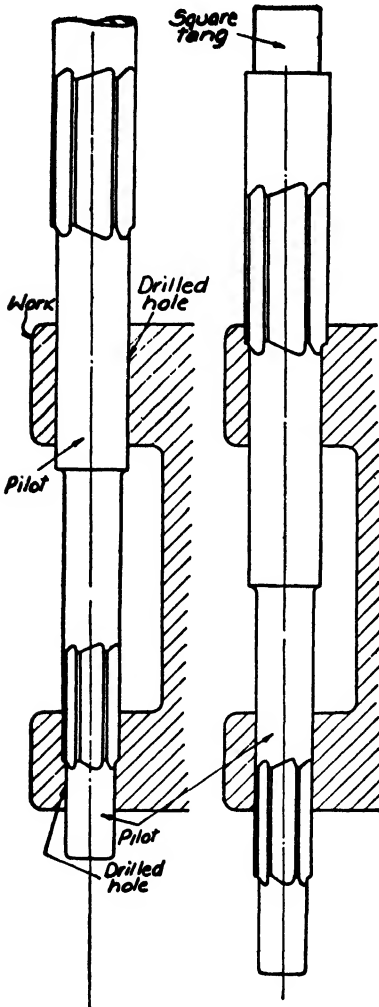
Hand Reamer for Finishing and Aligning Drilled Holes.
